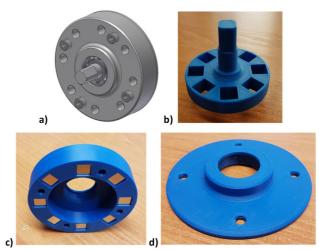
Single-row cylindrical clutch: a) 3D model, b) rotor – print, c) stator – print, d) cover – print Source: [6].
